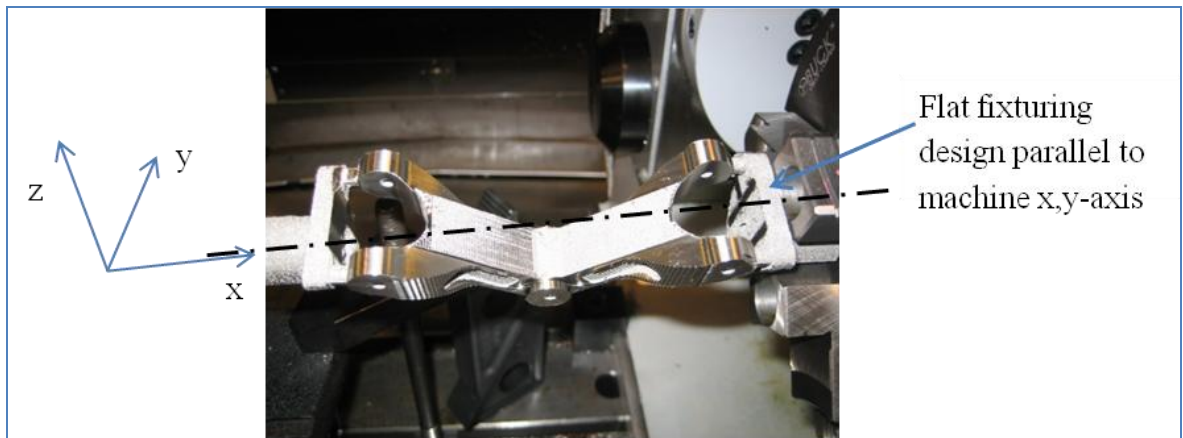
Flat Surfaces-used to align the Part with the Machine Axis
